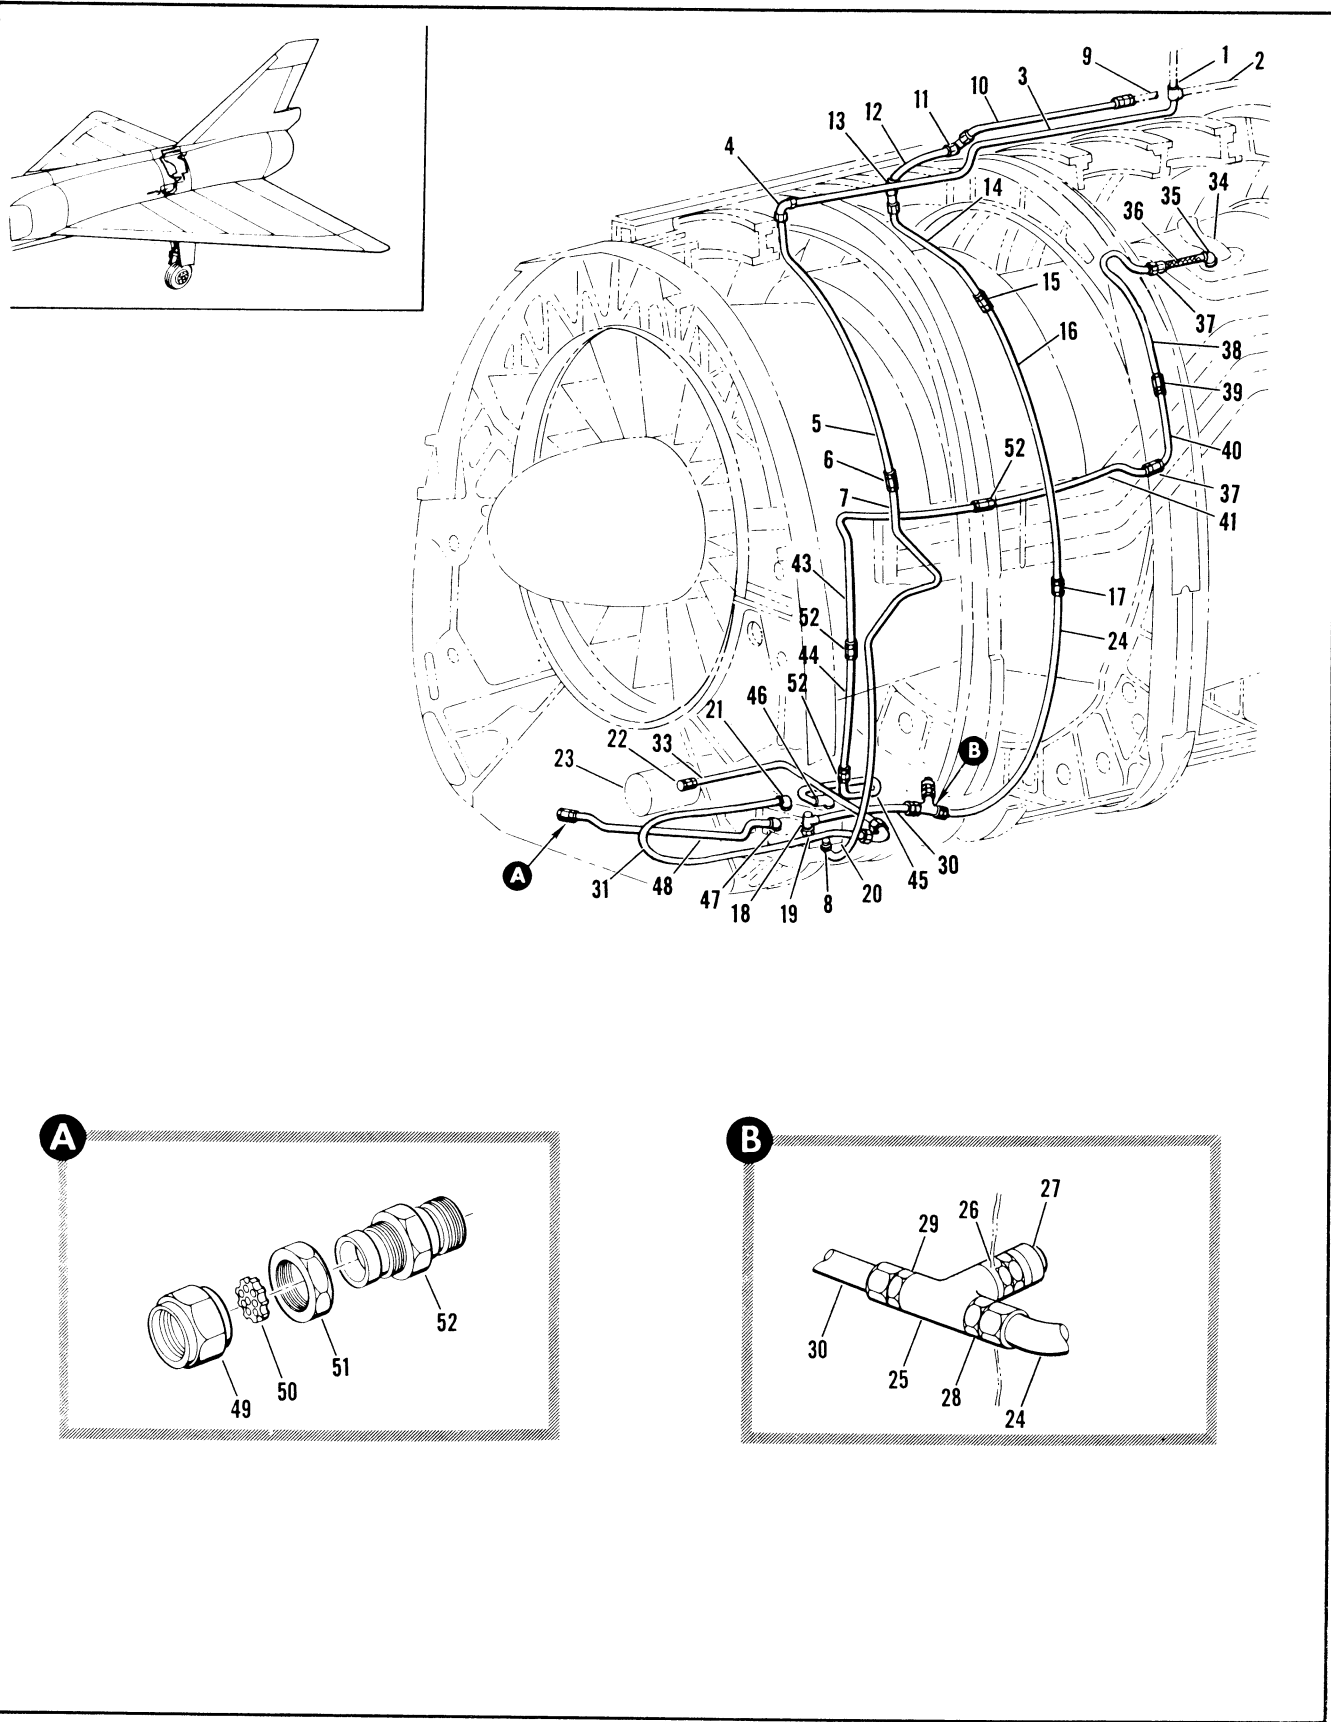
Elevator and Rudder Airfeel Tubing Installation Sta 472 to Vertical Stabilizer
